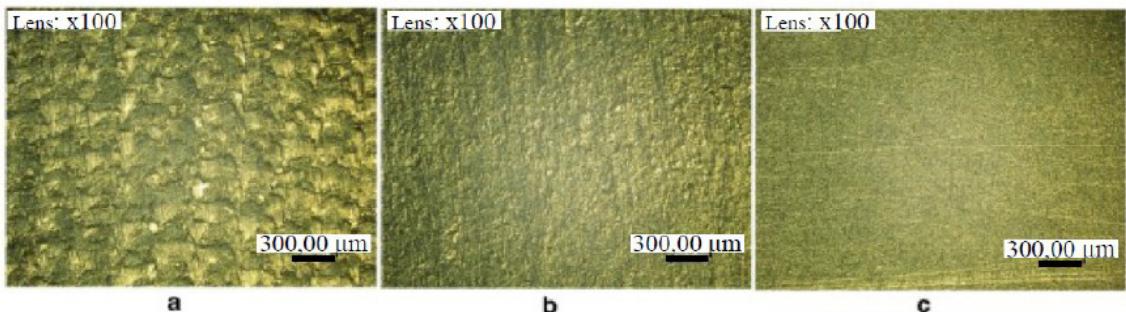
a – Surface of a titanium workpiece after milling. b – Surface of a titanium workpiece after magnetic abrasive finishing. c – Surface of a titanium workpiece after ultrasonic vibration assisted magnetic abrasive finishing.
